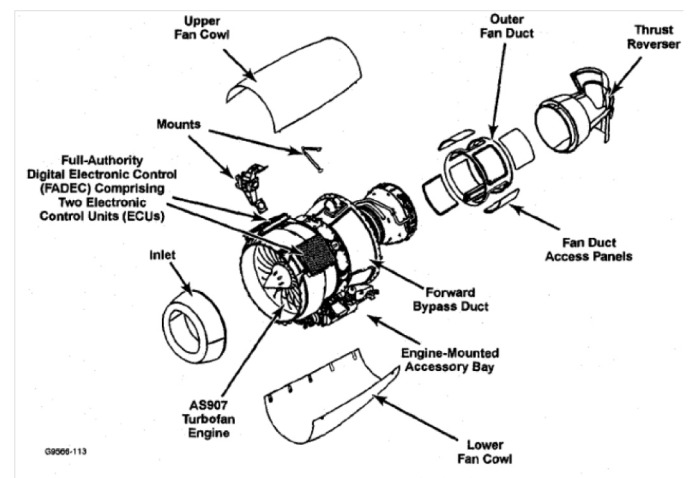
Exploded view of HTF7000 engine showing ducting, nacelle components, and thrust reverser.
